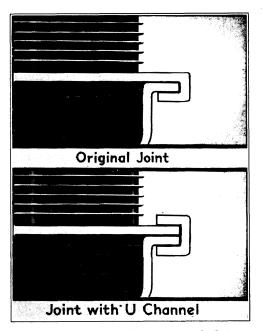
Radiator Core-to-Tank Joints Typical of 40-50, 52, 62, 72, 60S and 75
